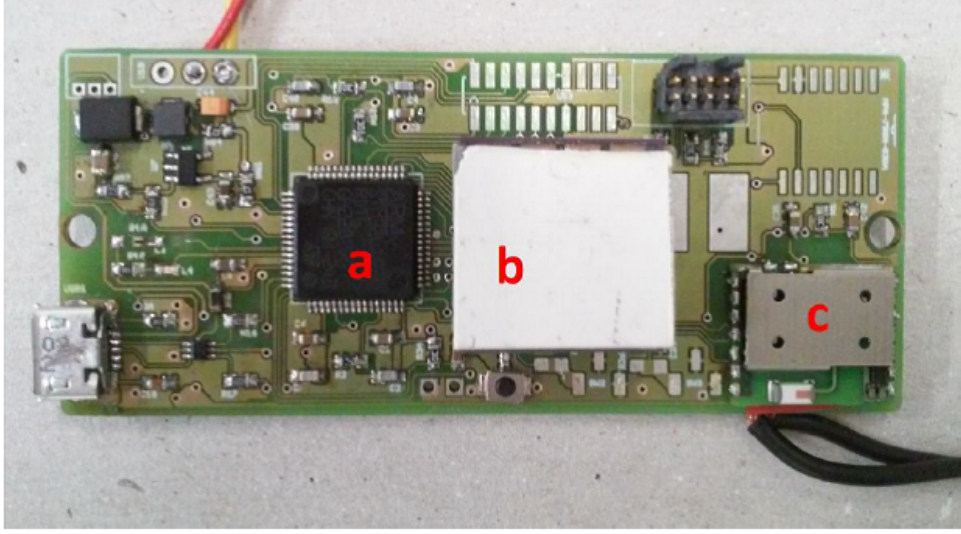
Picture of the fully assembled board. The microcontroller (a), SiPM coupled with a ZnS screen (b) and Bluetooth module are shown. The front-end electronics are located on the bottom layer.
